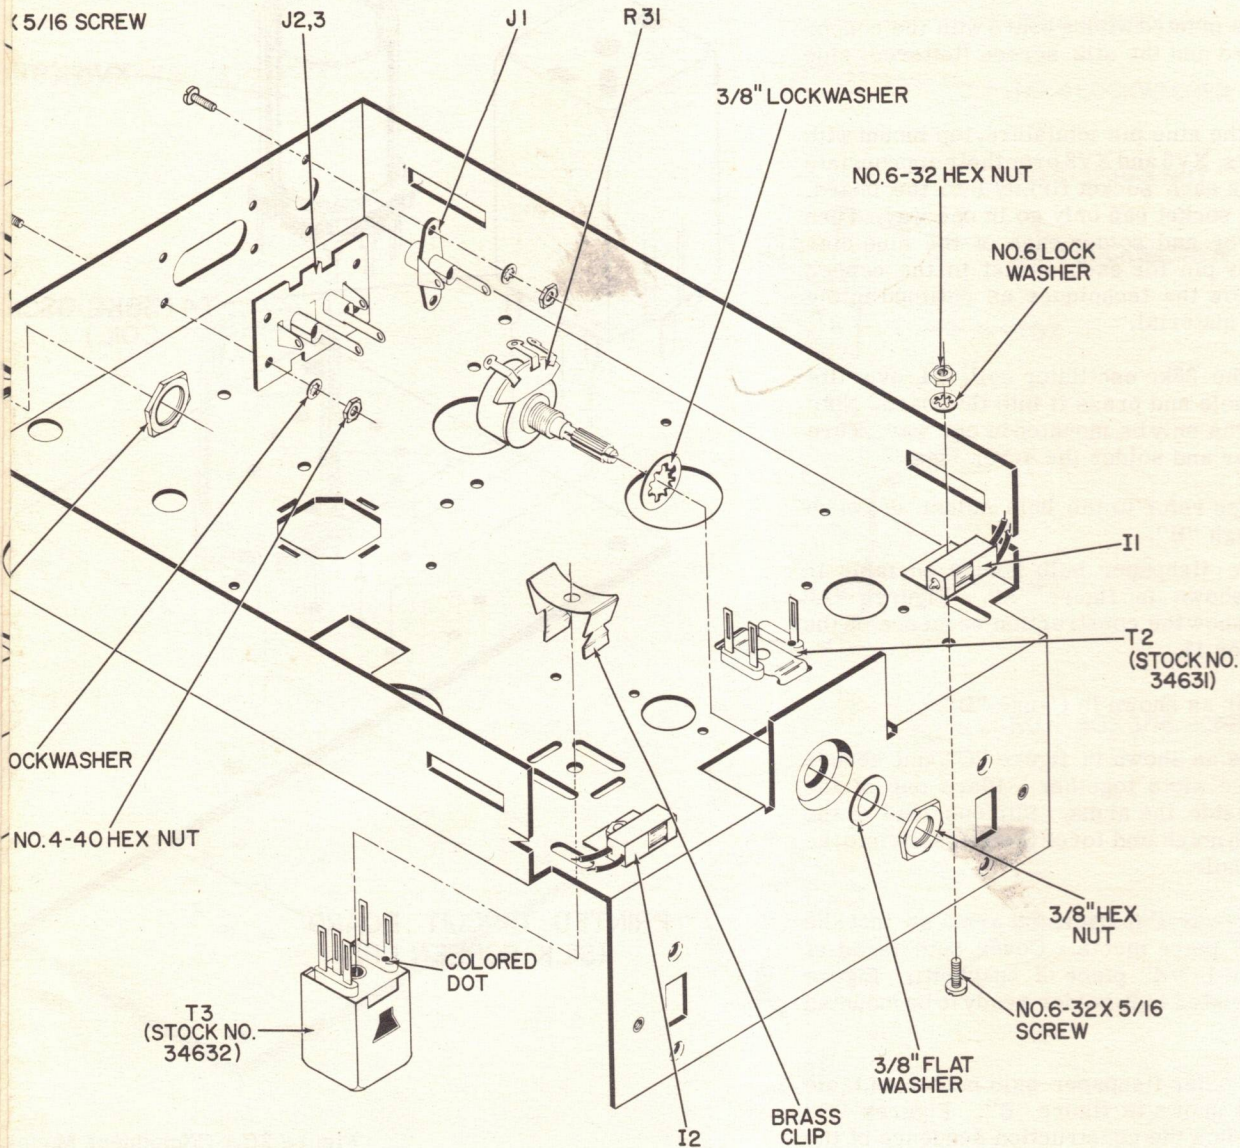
C. Bottom Chassis Mounting (Cont'd.)
